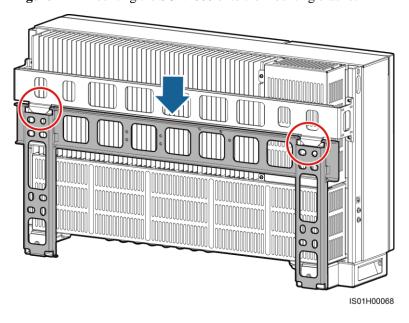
Mounting the SUN2000 onto the mounting bracket
